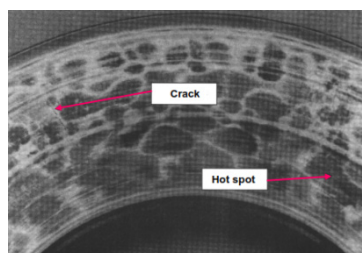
Thermal fatigue cracks on the surface of a disc brake made of grey cast iron, [2]
